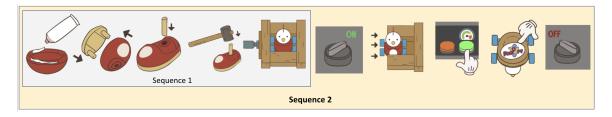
Toy assembly task sequence #2 (How to assemble toys - 10 steps including sequence 1).
